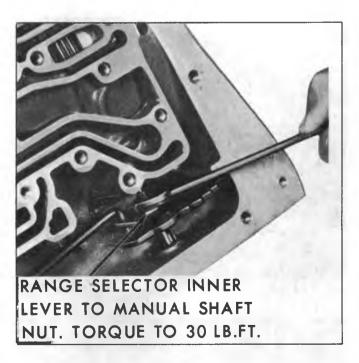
M--Loosening Nut Holding Range Selector Inner Lever to Manual Shaft
